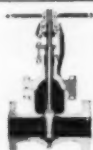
Gate valve, 600 lb at 850 F. (1440 lb WOG), with hard-surfaced seats and wedge, ball bearing yoke, flanged ends. Sizes $2\frac{1}{2}$ " to 12".
